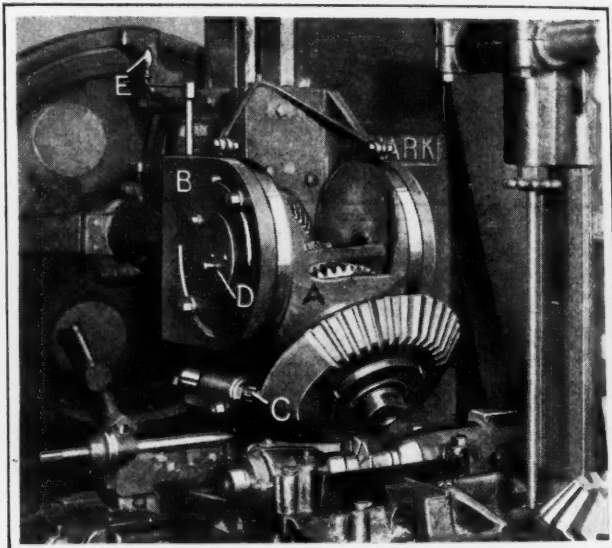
Bevel-gear Cutting Attachment Designed for a Larger Machine than that Shown in Fig. 1
